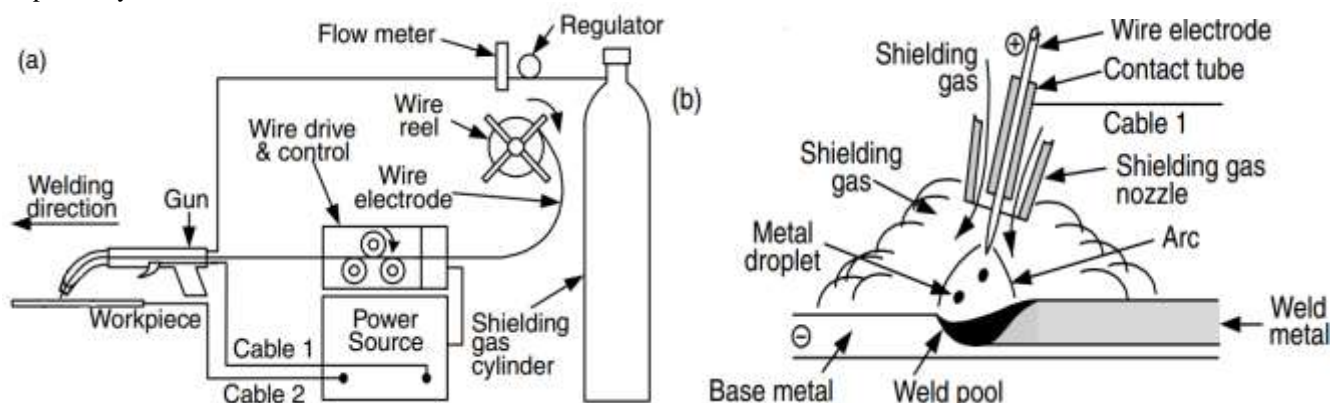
Gas-metal arc welding: (a) overall process; (b) welding area enlarged
